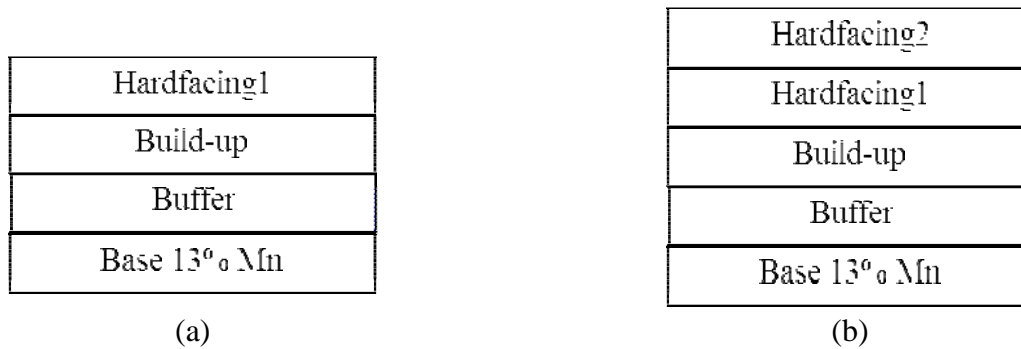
Schematic of welding layers deposition in the different atmospheric condition.
